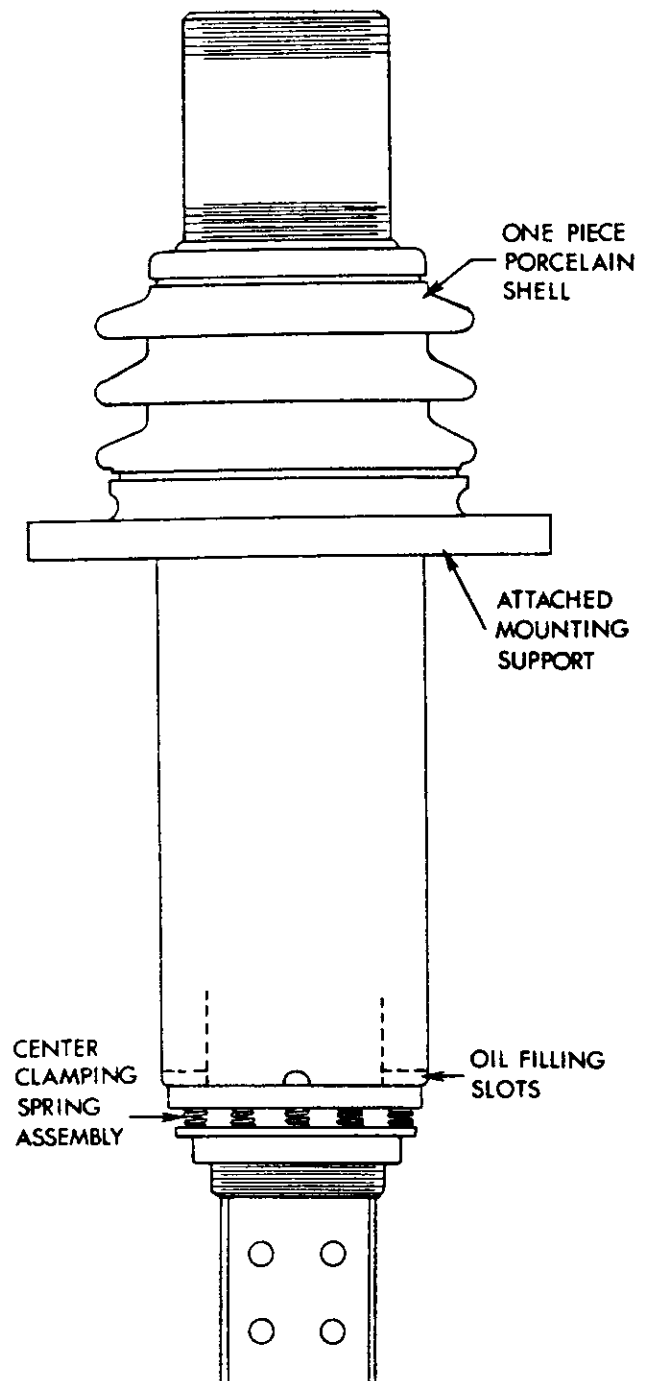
Type A bushing with a fixed conductor (4000 and 5000 amperes)
